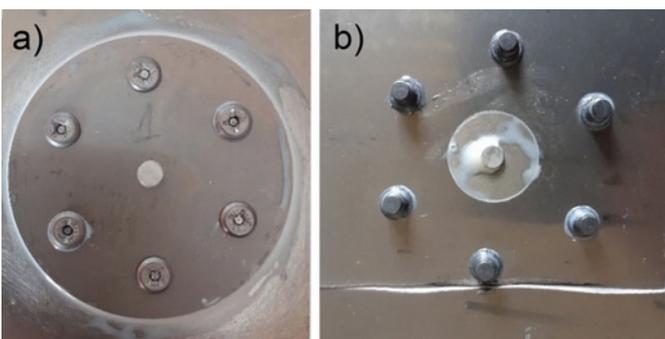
View of a hybrid strapped joint (MBF2110AB-05-150 rivets and Epidian 57/Z1 compound): (a) after preparation of specimen, (b) damaged in durability tests
